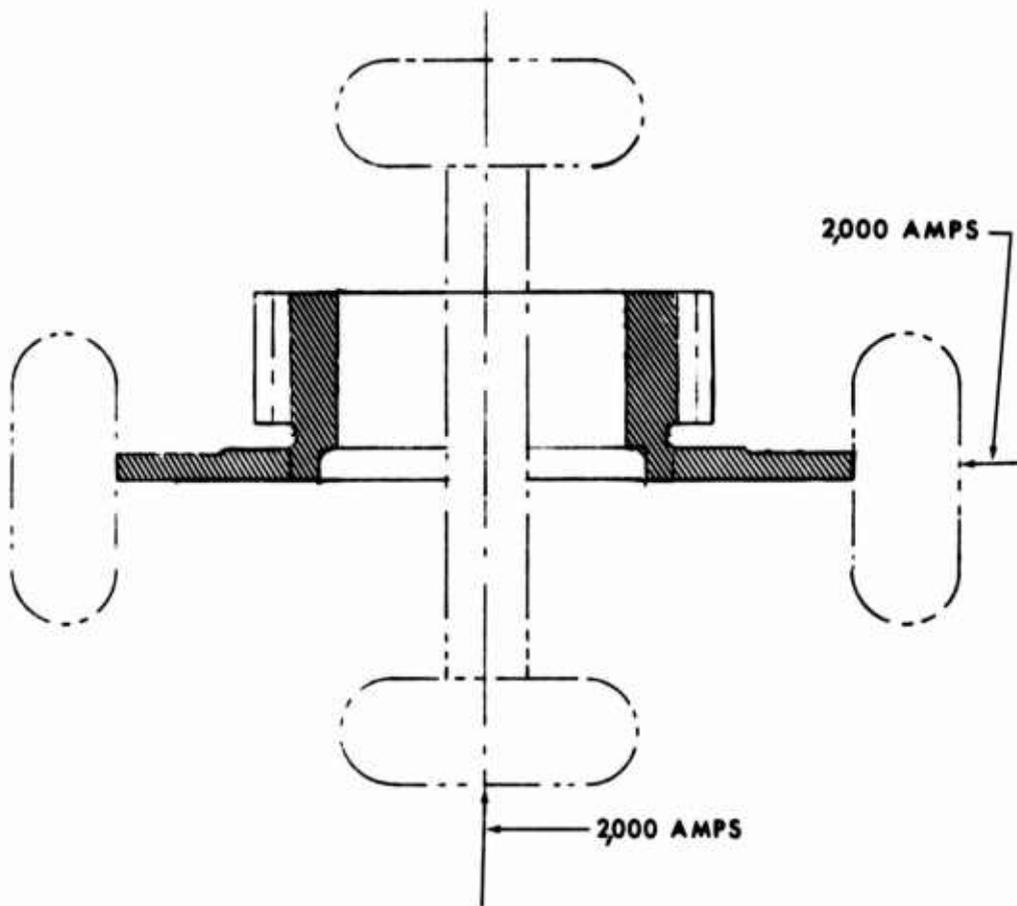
Magnetization Currents and Orientation for Inspection of Second-Row Pinion, Upper Gear and Flange.
